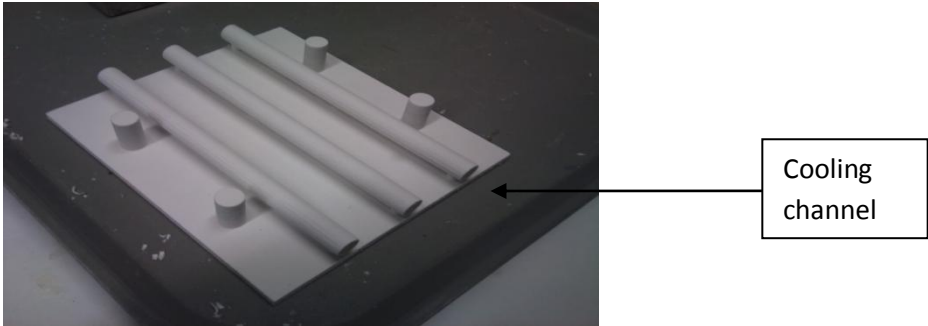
The base for conventional cooling channel which is made by using rapid prototyping machine
